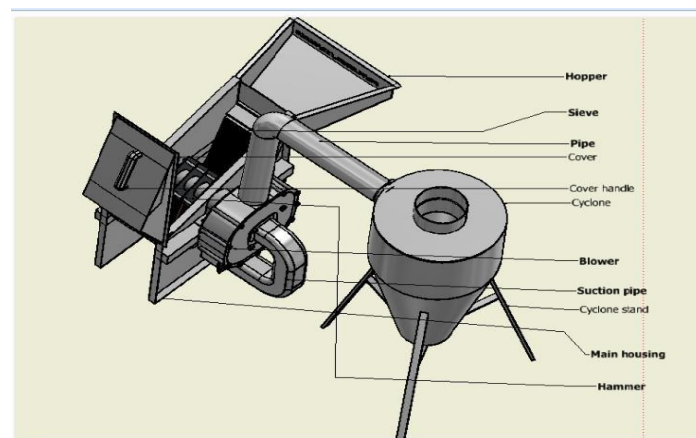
Isometric view of the Magnetic Sieve Grinding Machine
